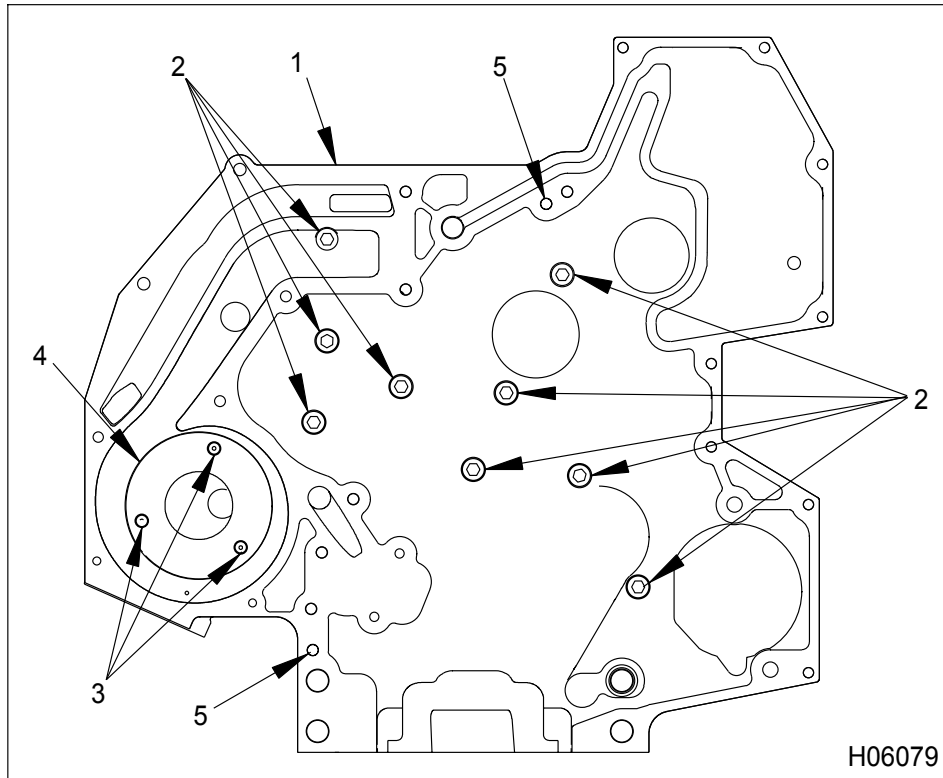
Front cover mounting bolts – rear half (Generation 1)
